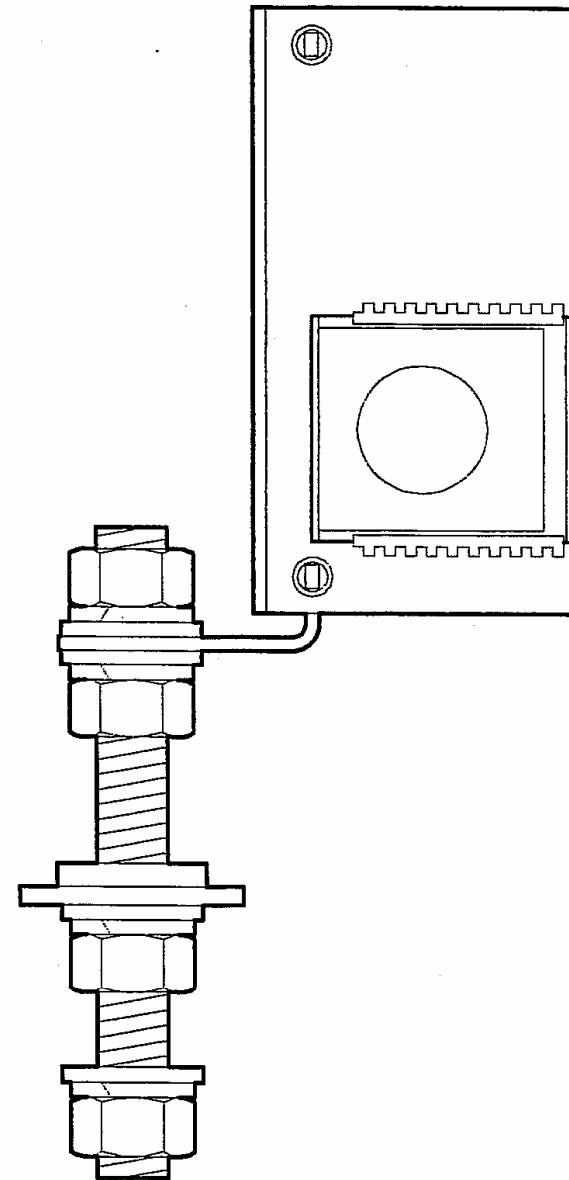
Assembly Detail - Safety Ground Assembly (P/N 176-7200-02)
